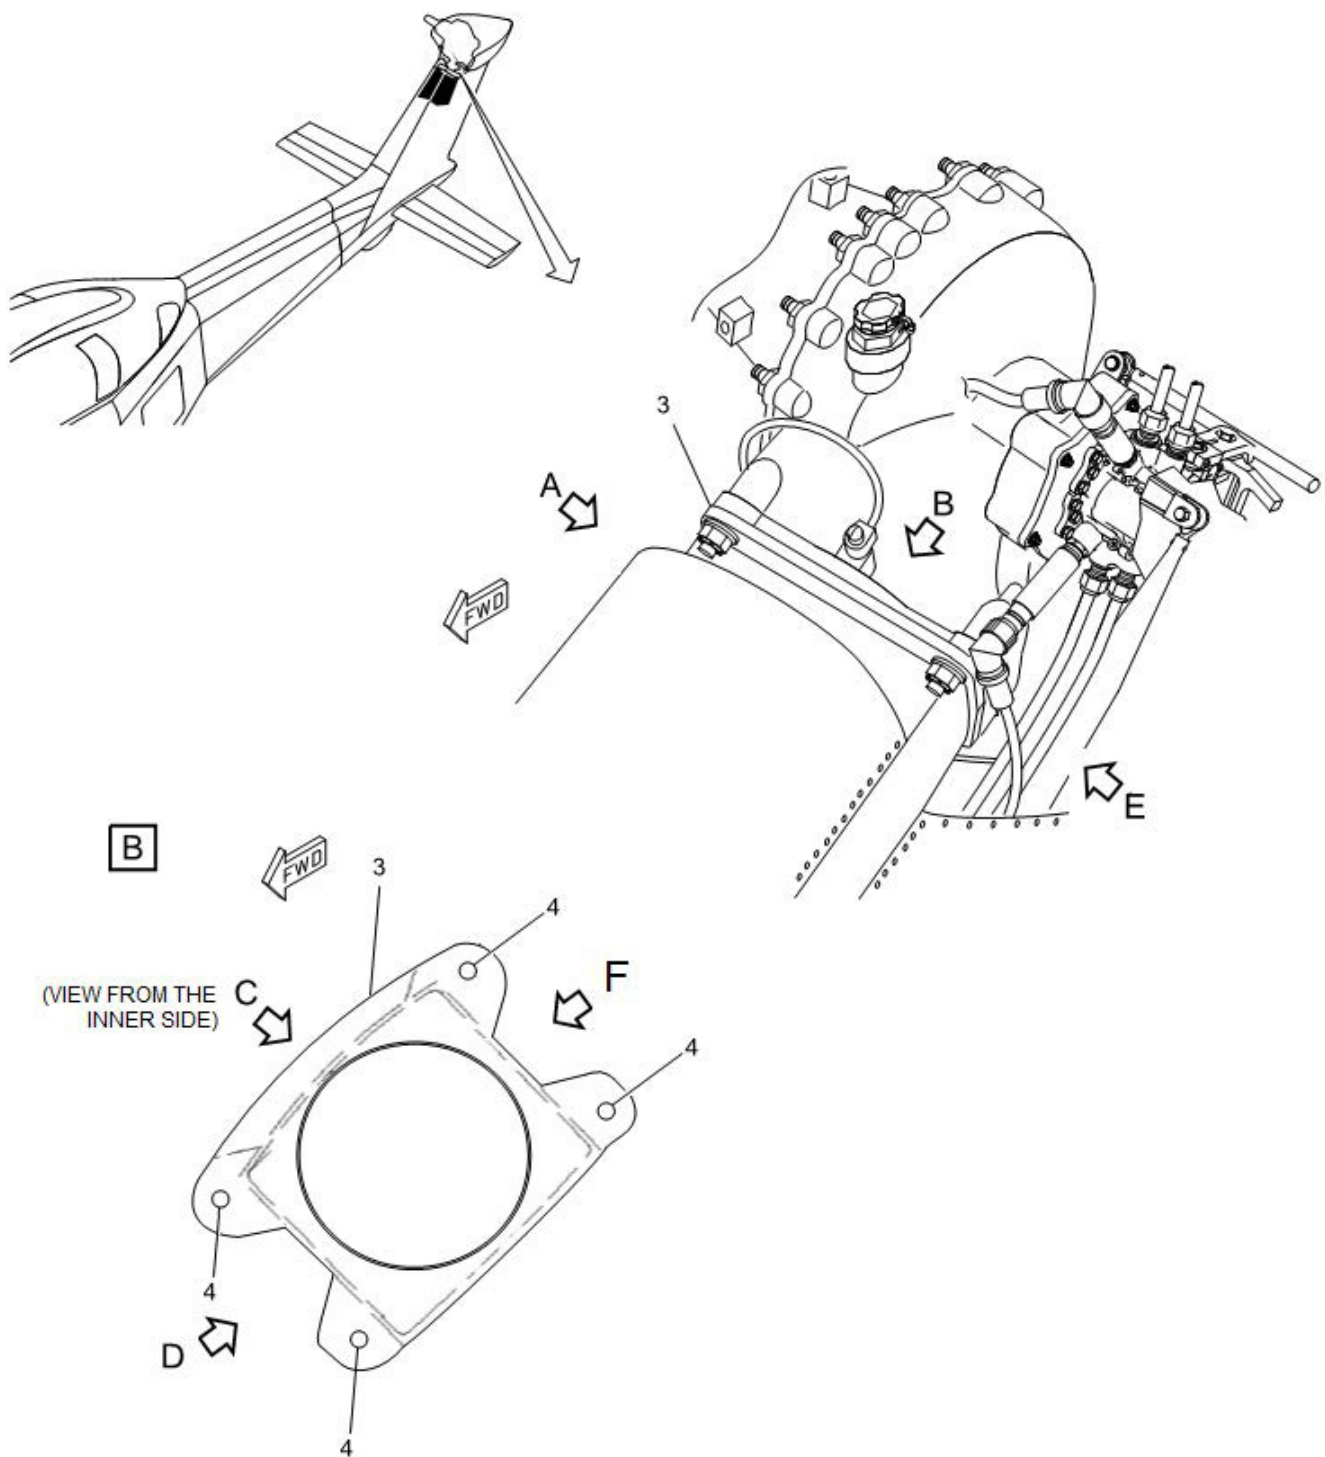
Tail section - Tail gearbox attachment structure - Detailed inspection (Sheet 1 of 5)
